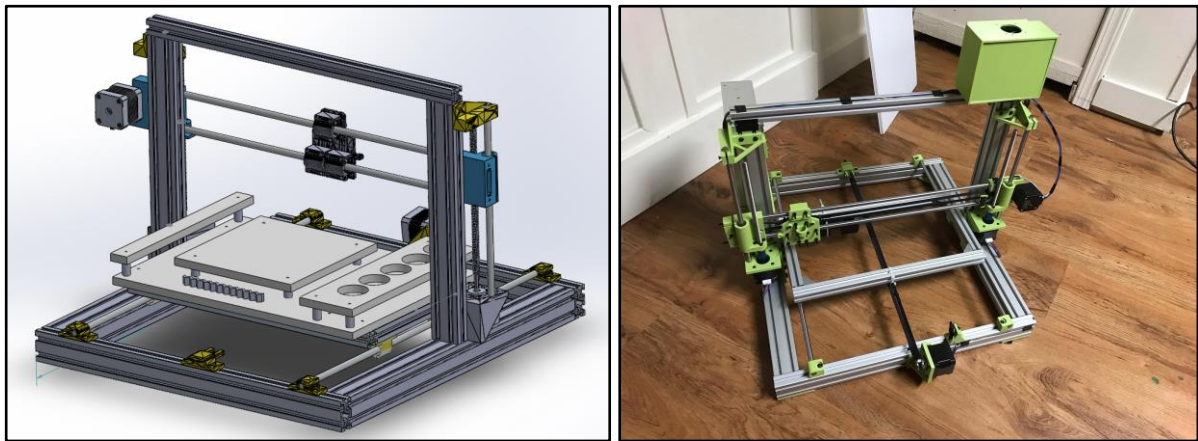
Side-by-side CNC CAD assembly and WIP build.
